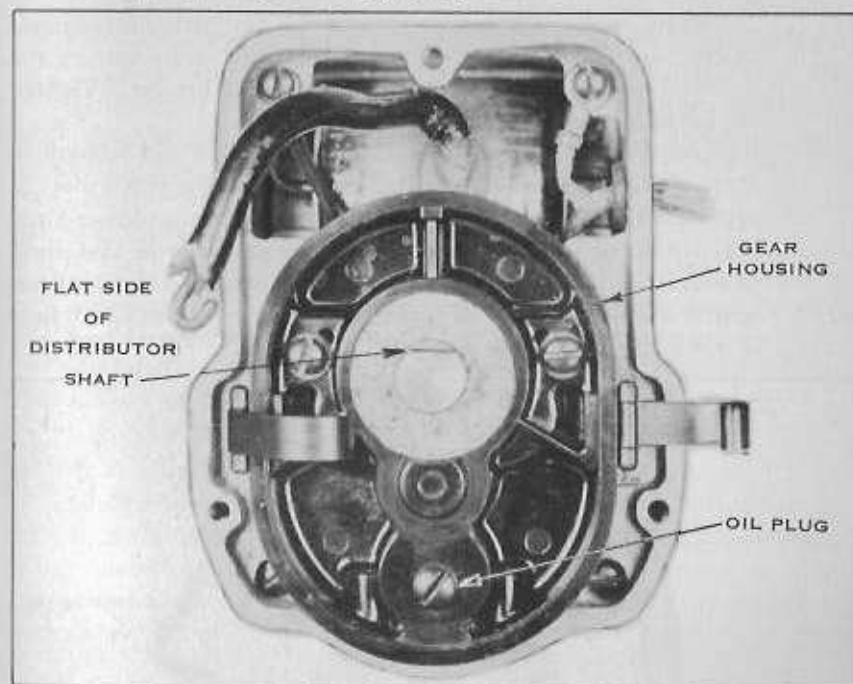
MAGNETO (SHOWING GEAR HOUSING)
